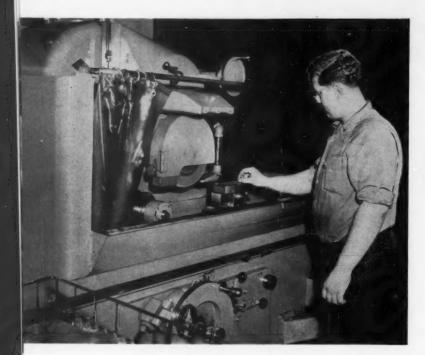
Surface grinding the concave face of a turbine stator blade. A master form is mounted on the left-hand end of machine table.
